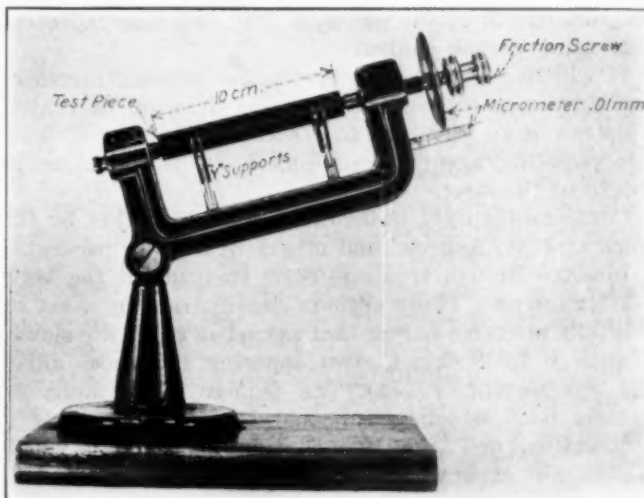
MICROMETER AND FIXTURE FOR LENGTH
